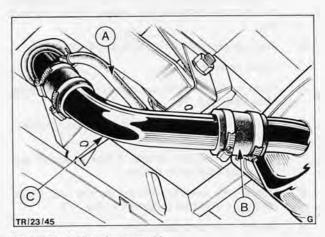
Tank filler pipe assembly A – Tank ventilation tube B – Filler pipe connector
